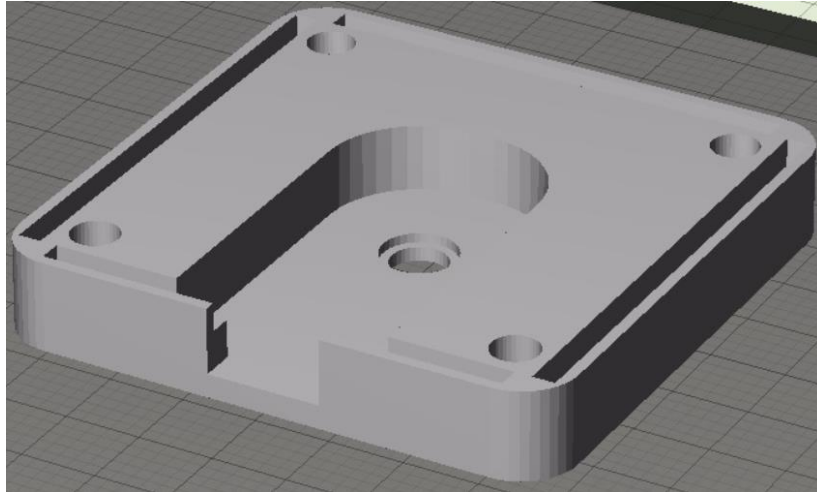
Solid Works Design for encoder mount with recessed space for encoder.
